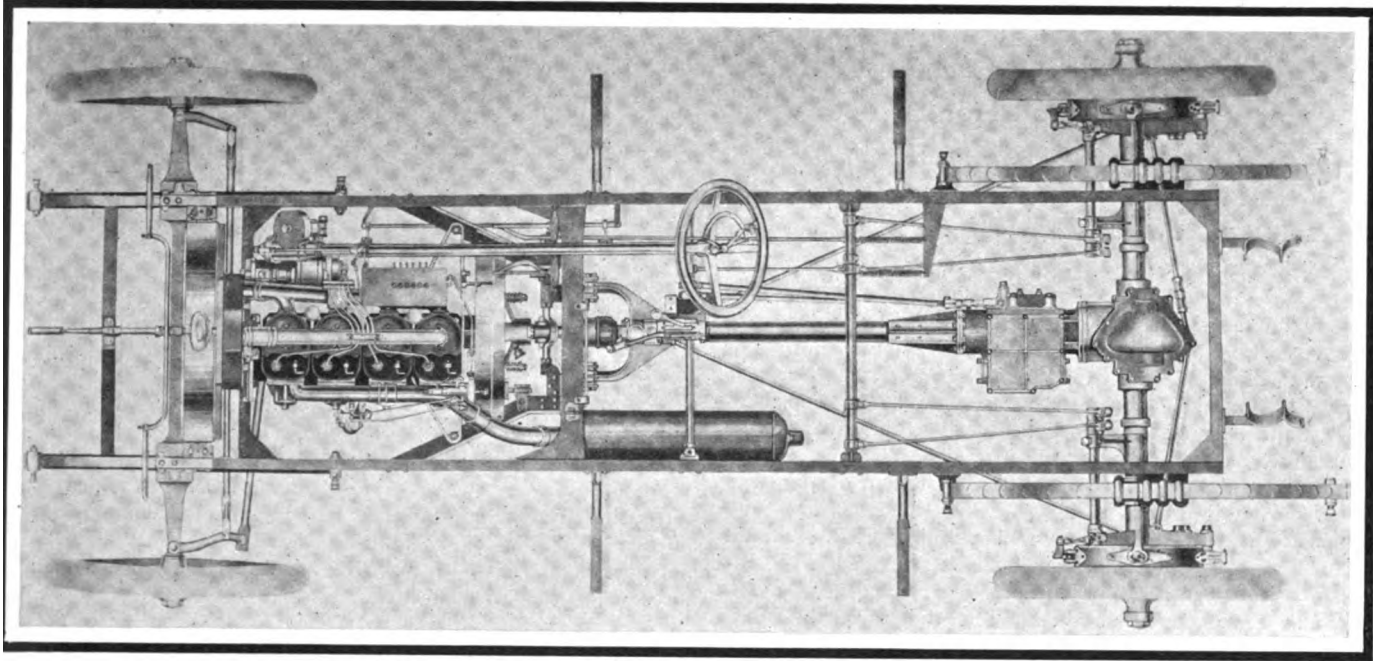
Plan view of chassis of model 69 of the 1913 Overland line, showing location of gearbox
